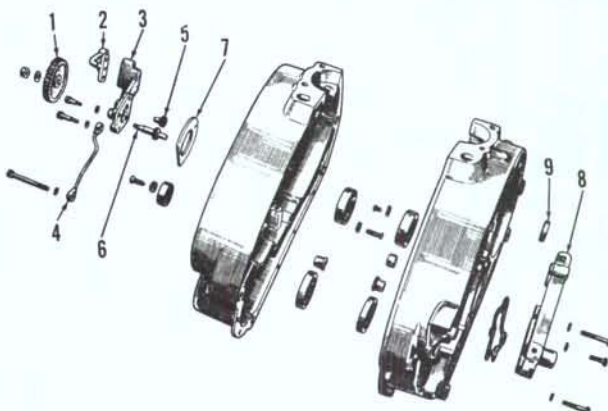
Exploded view of the crankcase halves and oil pump.
